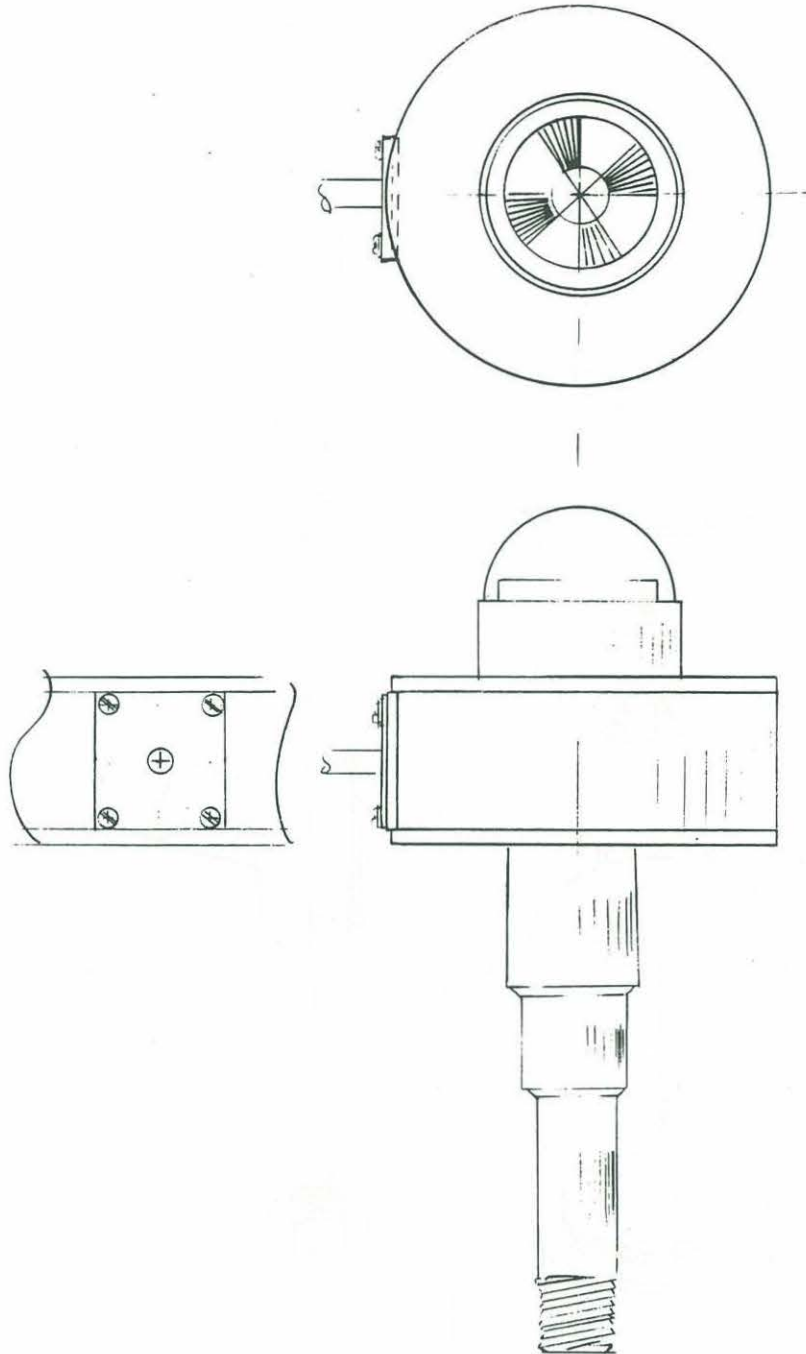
Assembly drawing of the Hy-Cal pyranometer and mount, with the amplifier housing.
